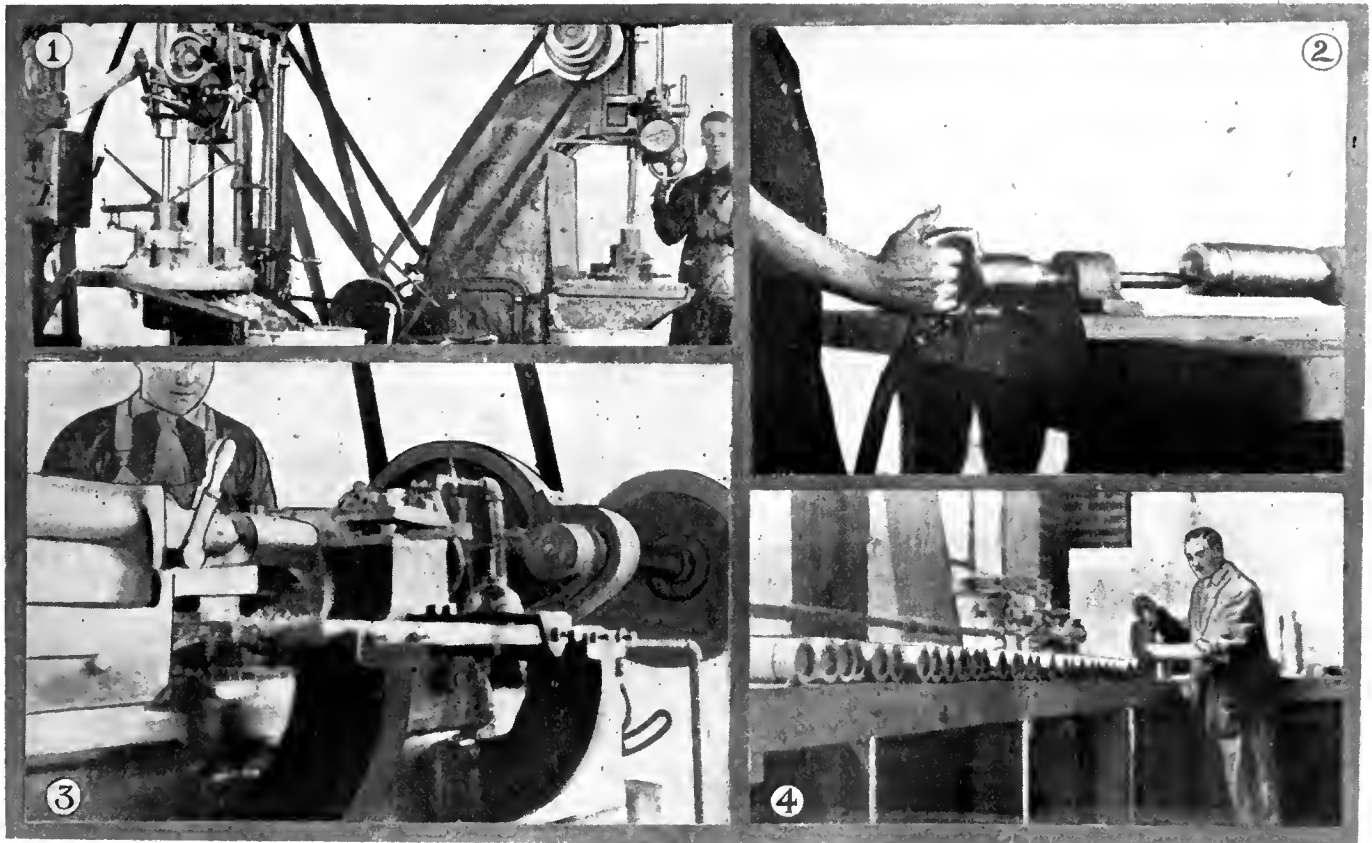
BORING OUT BILLETS ON DRILL PRESSES. (2)—PEENING PLUG IN BASE OF SHELL WITH PNEUMATIC HAMMER. (3)—FINISHING SHELL BODY OUTSIDE AND ROUGHING OUT BAND GROOVE. (4)—GOVERNMENT INSPECTION DEPARTMENT.
